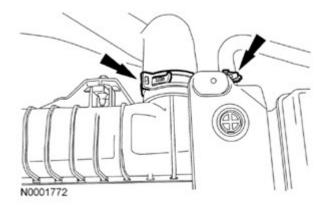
Locating Upper Radiator And Degas Bottle Coolant Hoses Clamps Courtesy of FORD MOTOR CO.
